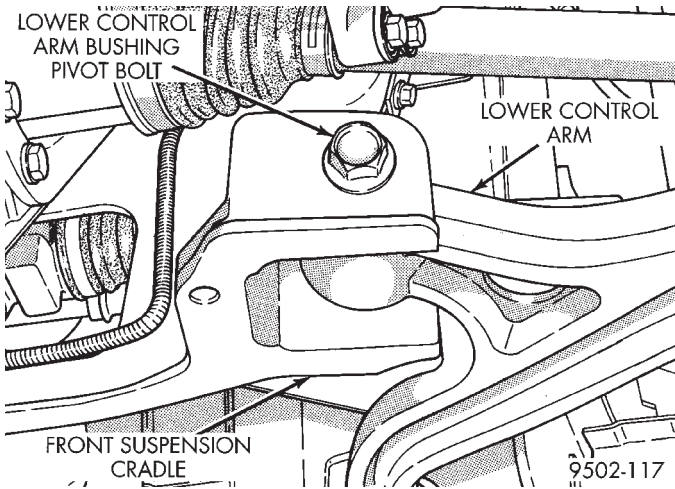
Lower Control Arm Bushing Pivot Bolt Correctly Installed
